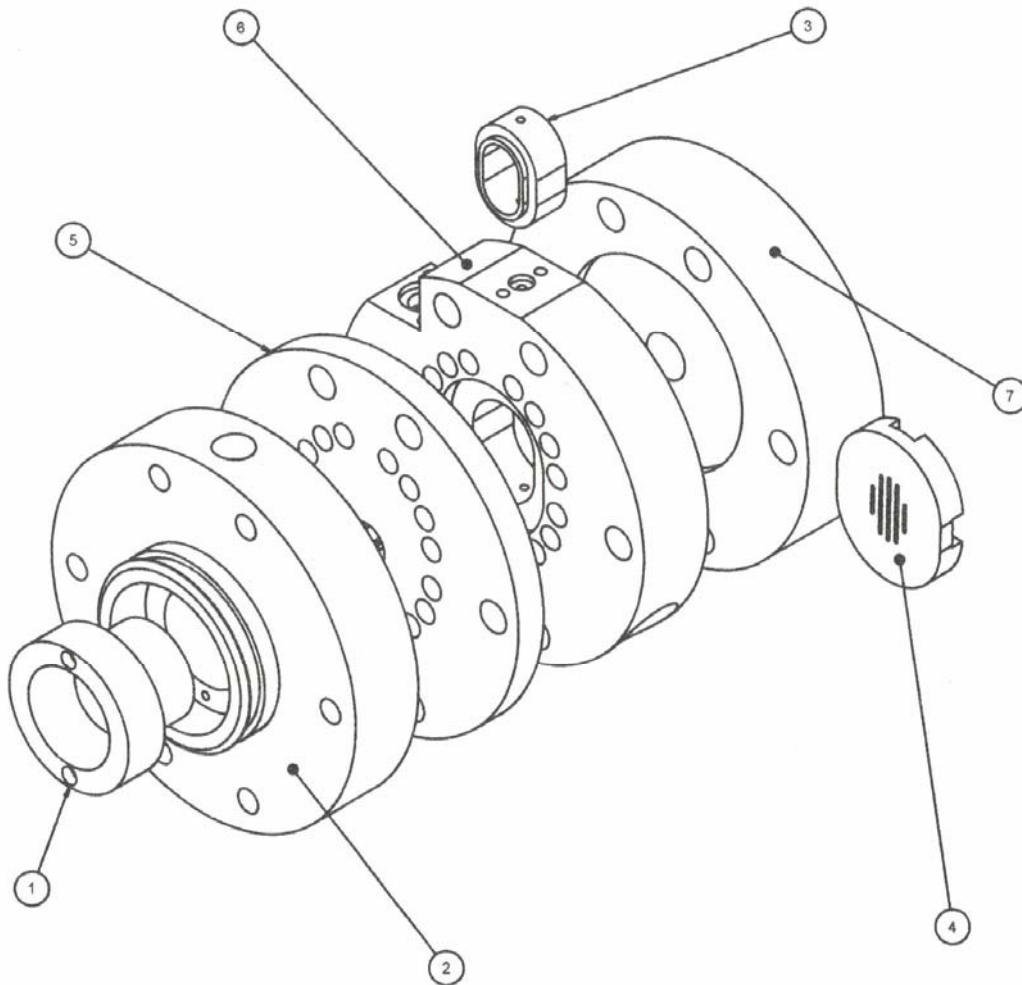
TS-5 Assembly Drawing (Mark Humphrey 2005)
